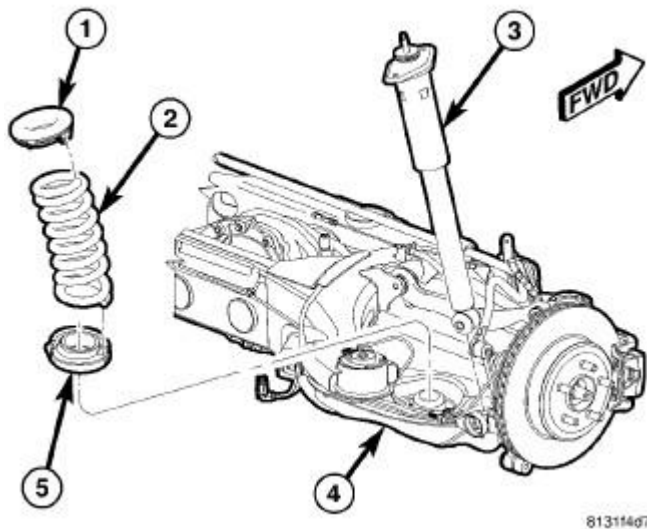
COIL SPRING AND SHOCK ASSEMBLY
